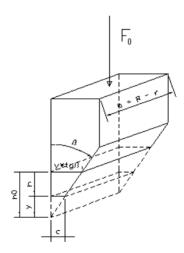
Crown tooth with technical elements with geometrical laws taken in account
